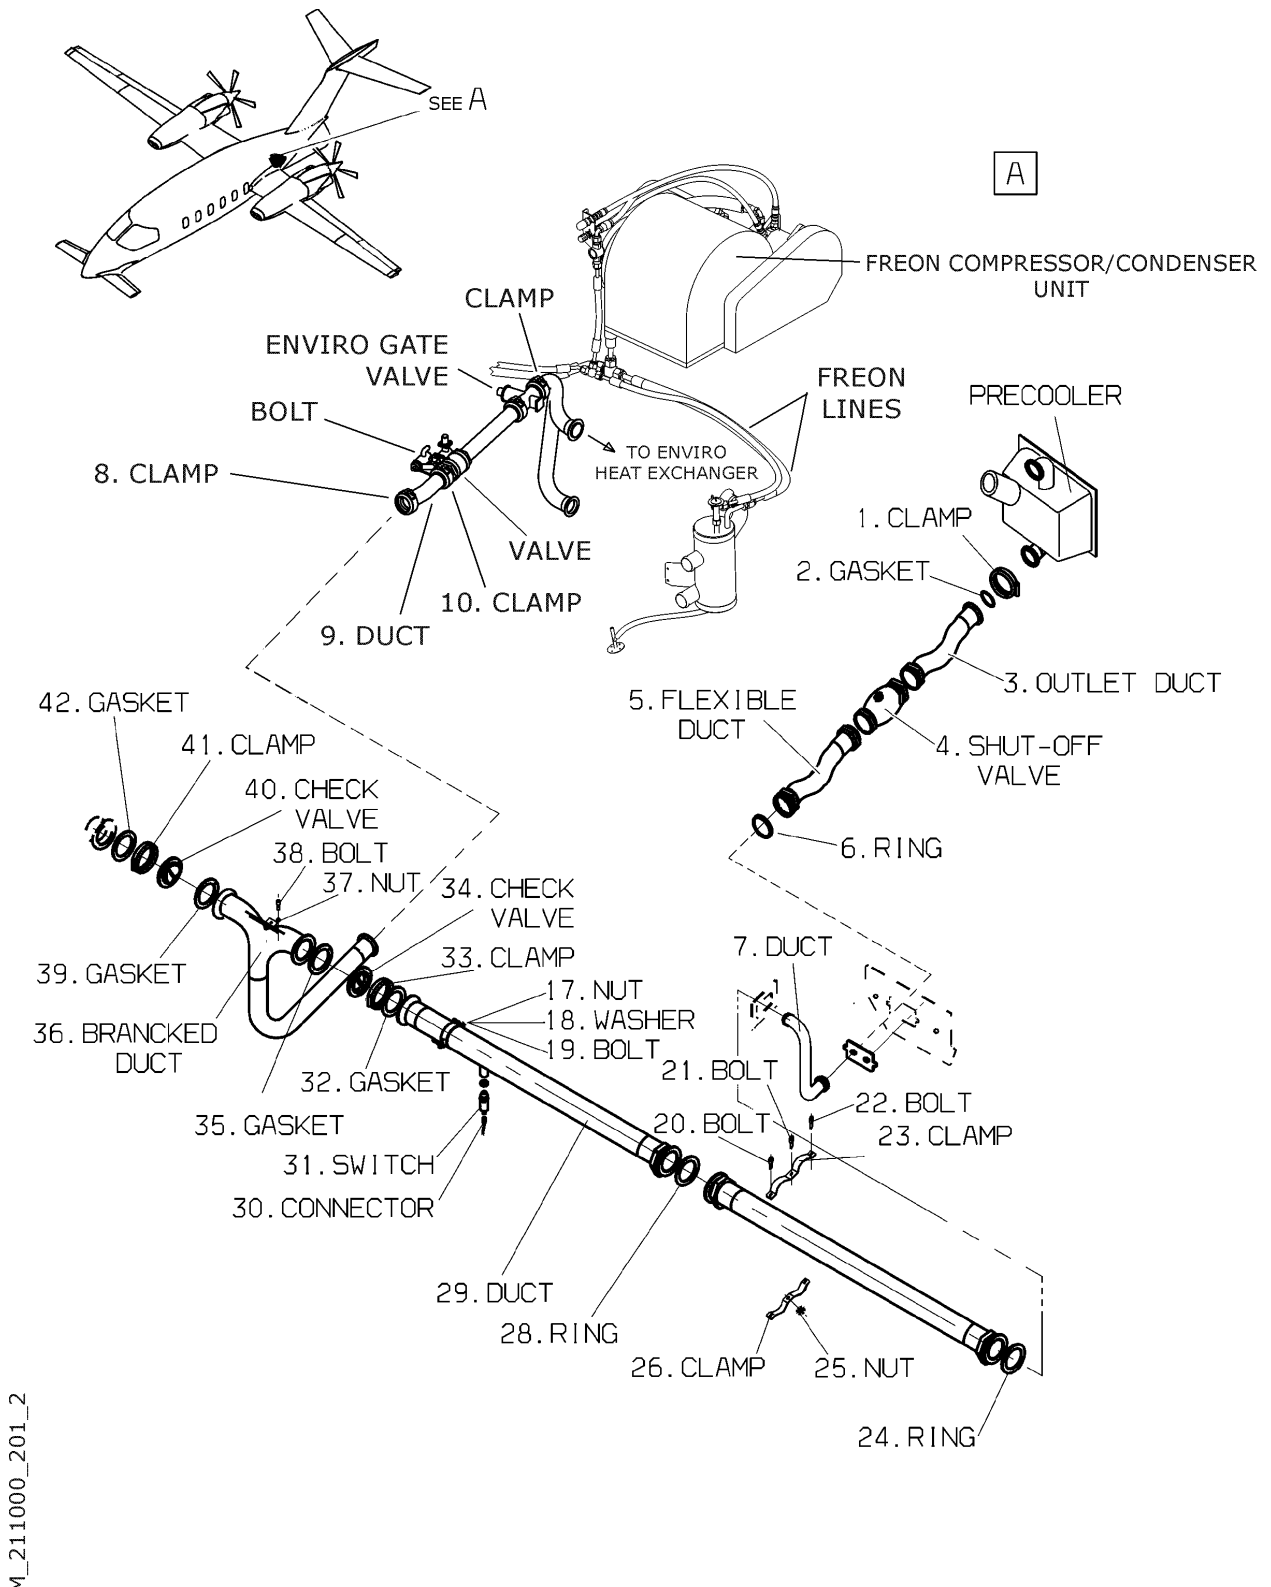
Bleed Air Ducts (Third Evaporator Installed) - Removal/Instal. (Sheet 2 of 3)
